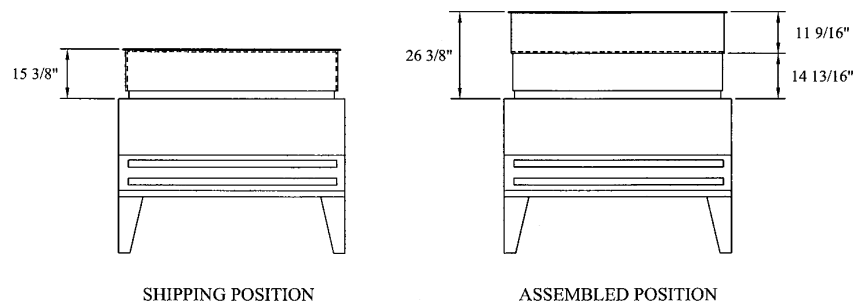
STANDARD 22" & 42" LEG ASSEMBLY
